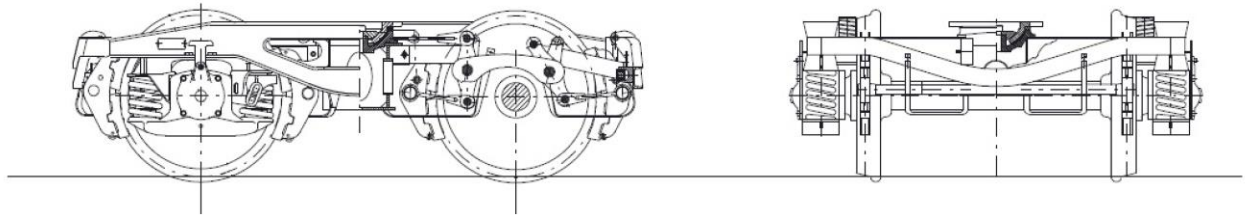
Schematic of the standard Y25 bogie and attached components [12]
